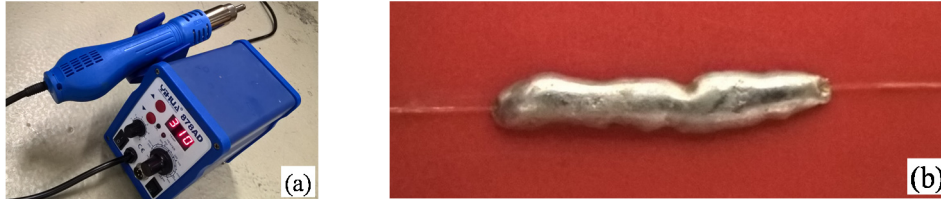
a) Solder gun used for coating process; b) FBG sensor coated with solder paste.
